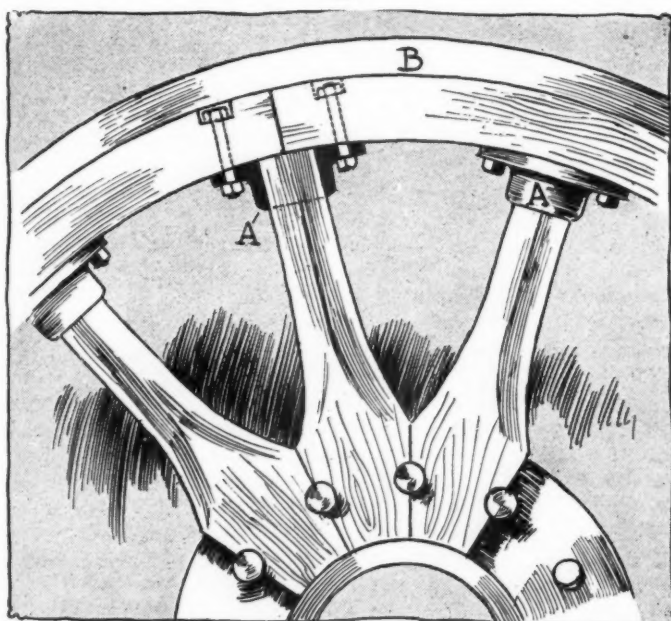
Section of truck wheel fitted with solid steel band instead of rubber tire, the band measuring 8 inches wide and 1.75 inches thick. The hub takes plain bearings
